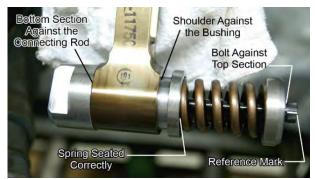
ST-531 Correctly Installed in the Connecting Rod
